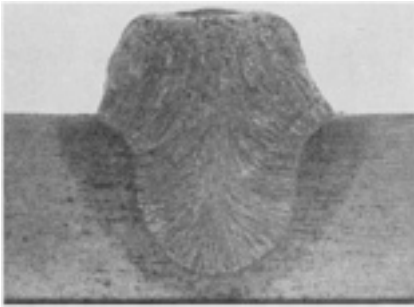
13-mm (0.5-in.) Lukens Frostline steel plate, submerged arc weld. Heat input: 2.0 MJ/m. Weld wire: AWS E70S-3. Macrostructure shows unusual bead shape due to surface tension and viscosity abnormalities in a calcium-fluoride-base experimental fused flux. 85 mL H₂O + 15 mL HNO₃ + 5 mL methanol. 1.5×
